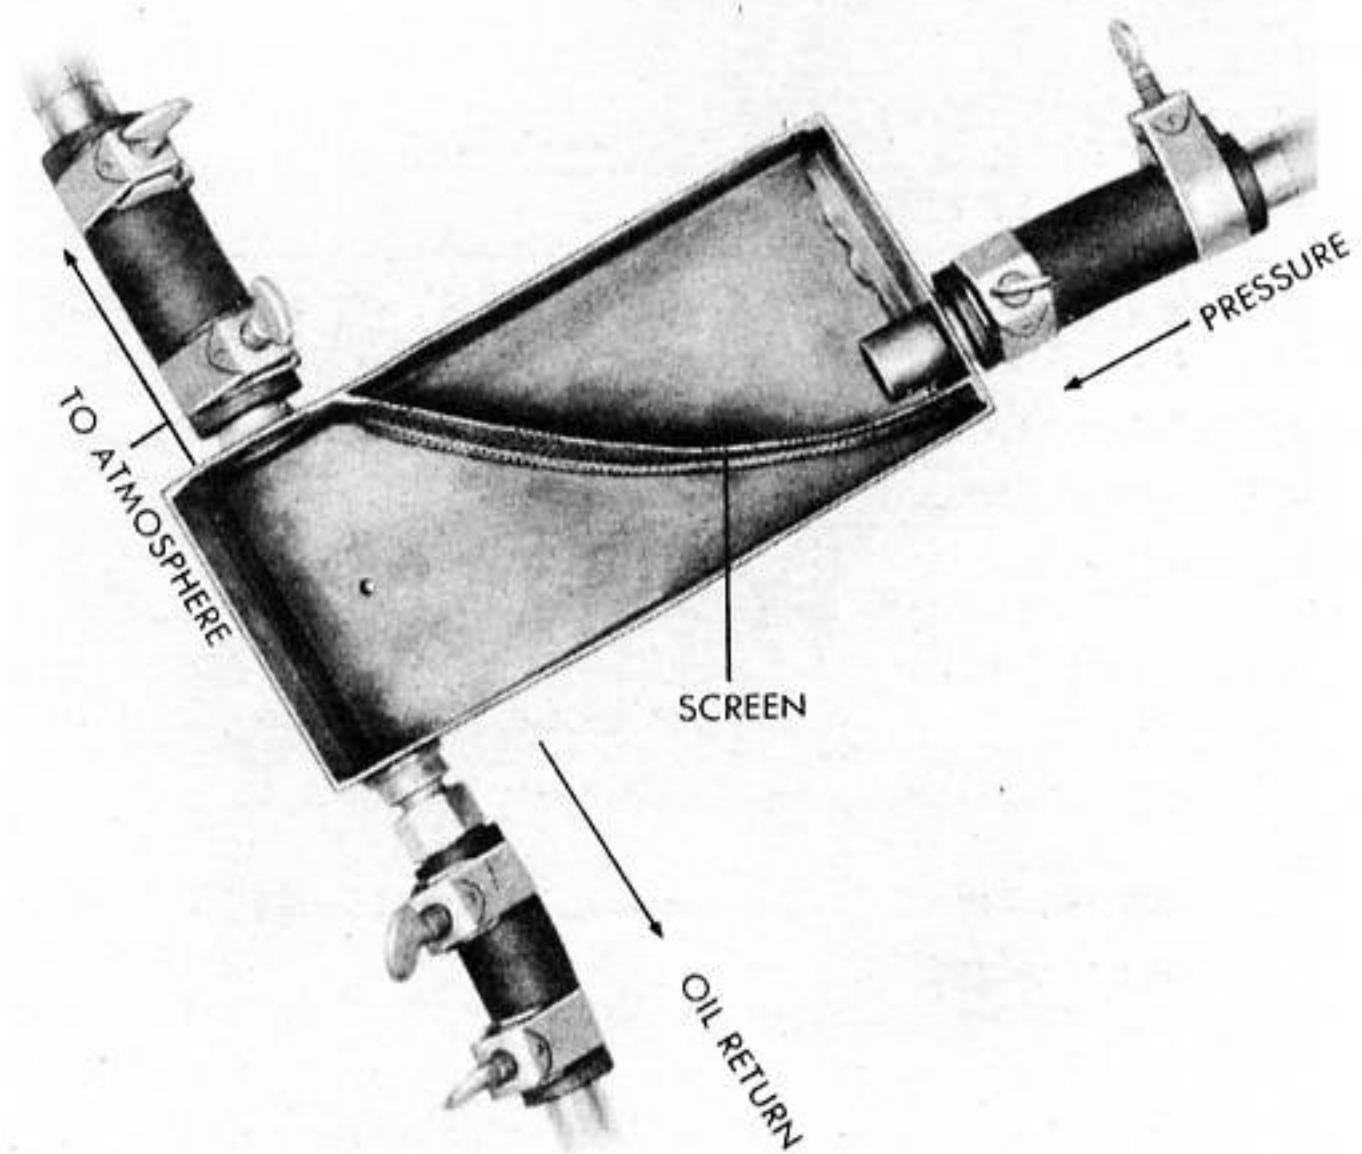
OIL SEPARATOR - CUTAWAY VIEW
